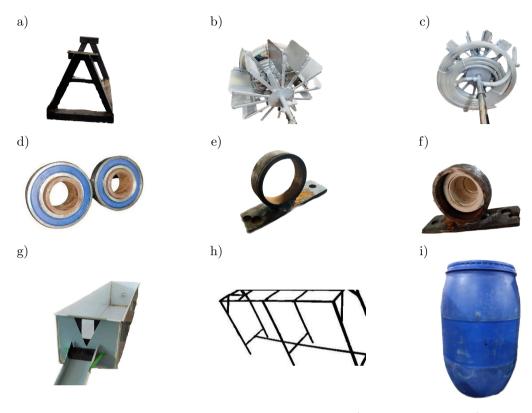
Different parts of the constructed coil pump set-up: a) supporting frame, b) wheel, c) PVC hose pipe, d) ball bearing, e) bearing block, f) housing block, g) open channel, h) supporting structure, i) water reservoir.
